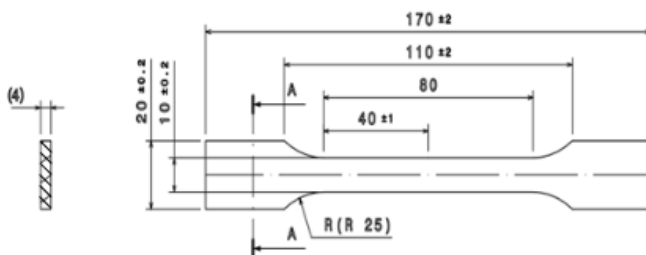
PA6-GF30 specimen (dimensions in mm).
